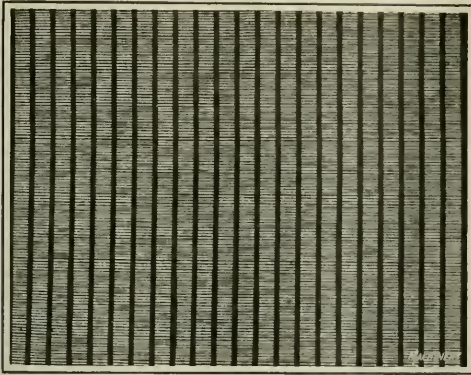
Hard Rubber Sheet slit by Punching Machine shown in Fig. 1
